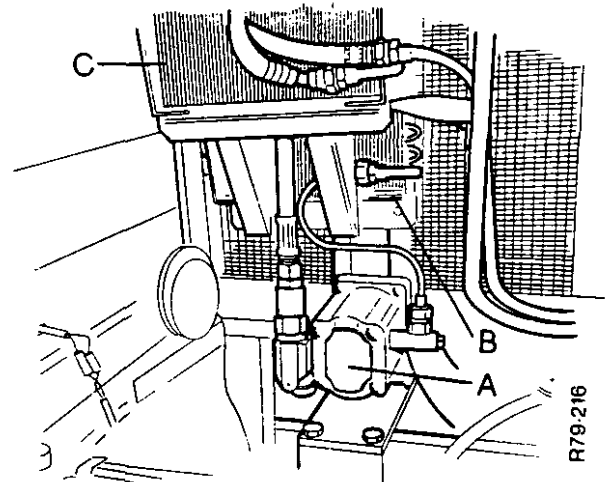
SINGLE HYDRAULIC PUMP, HYDRAULIC AND ENGINE OIL COOLERS
